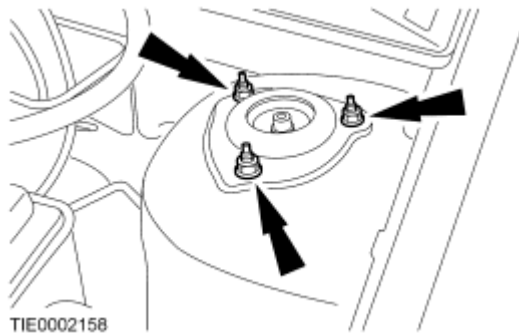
Locating LH Strut And Spring Assembly Top Mount Nuts
